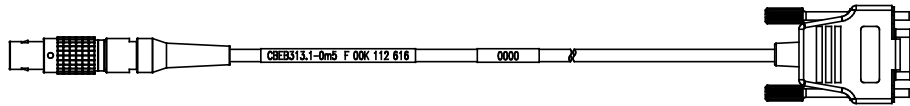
Unshielded Automotive-Ethernet cable CBEB313.1-0m5
